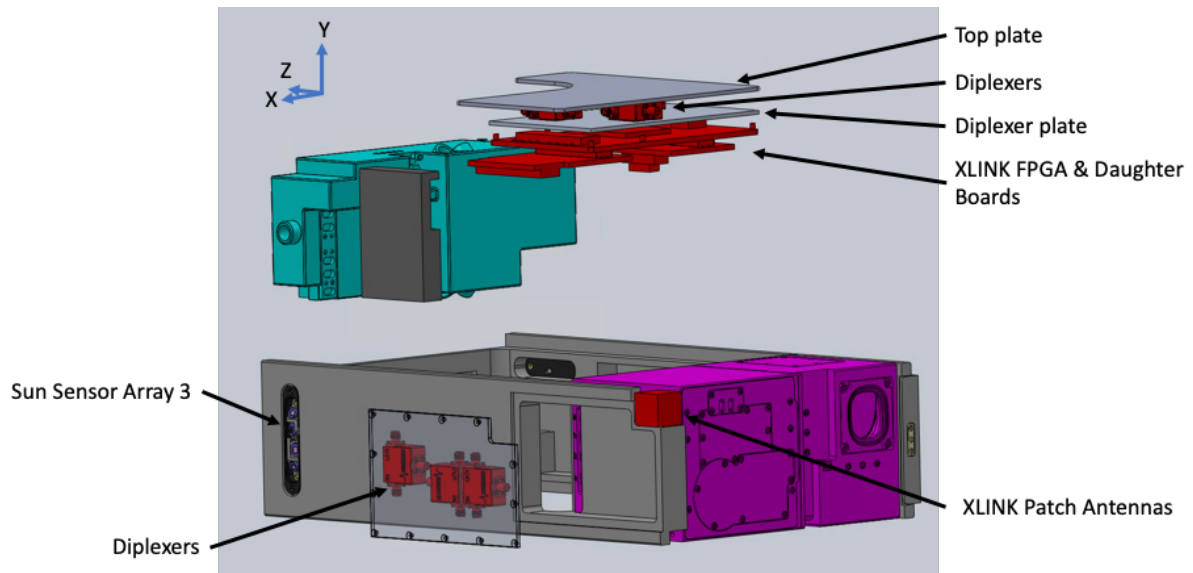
Alternate exploded view of OSC highlighting components not visible in Fig. 17.
